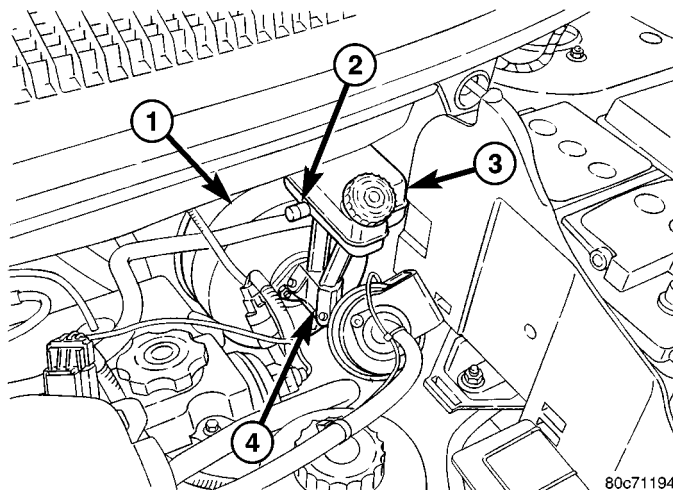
RHD MASTER CYLINDER AND POWER BRAKE BOOSTER
